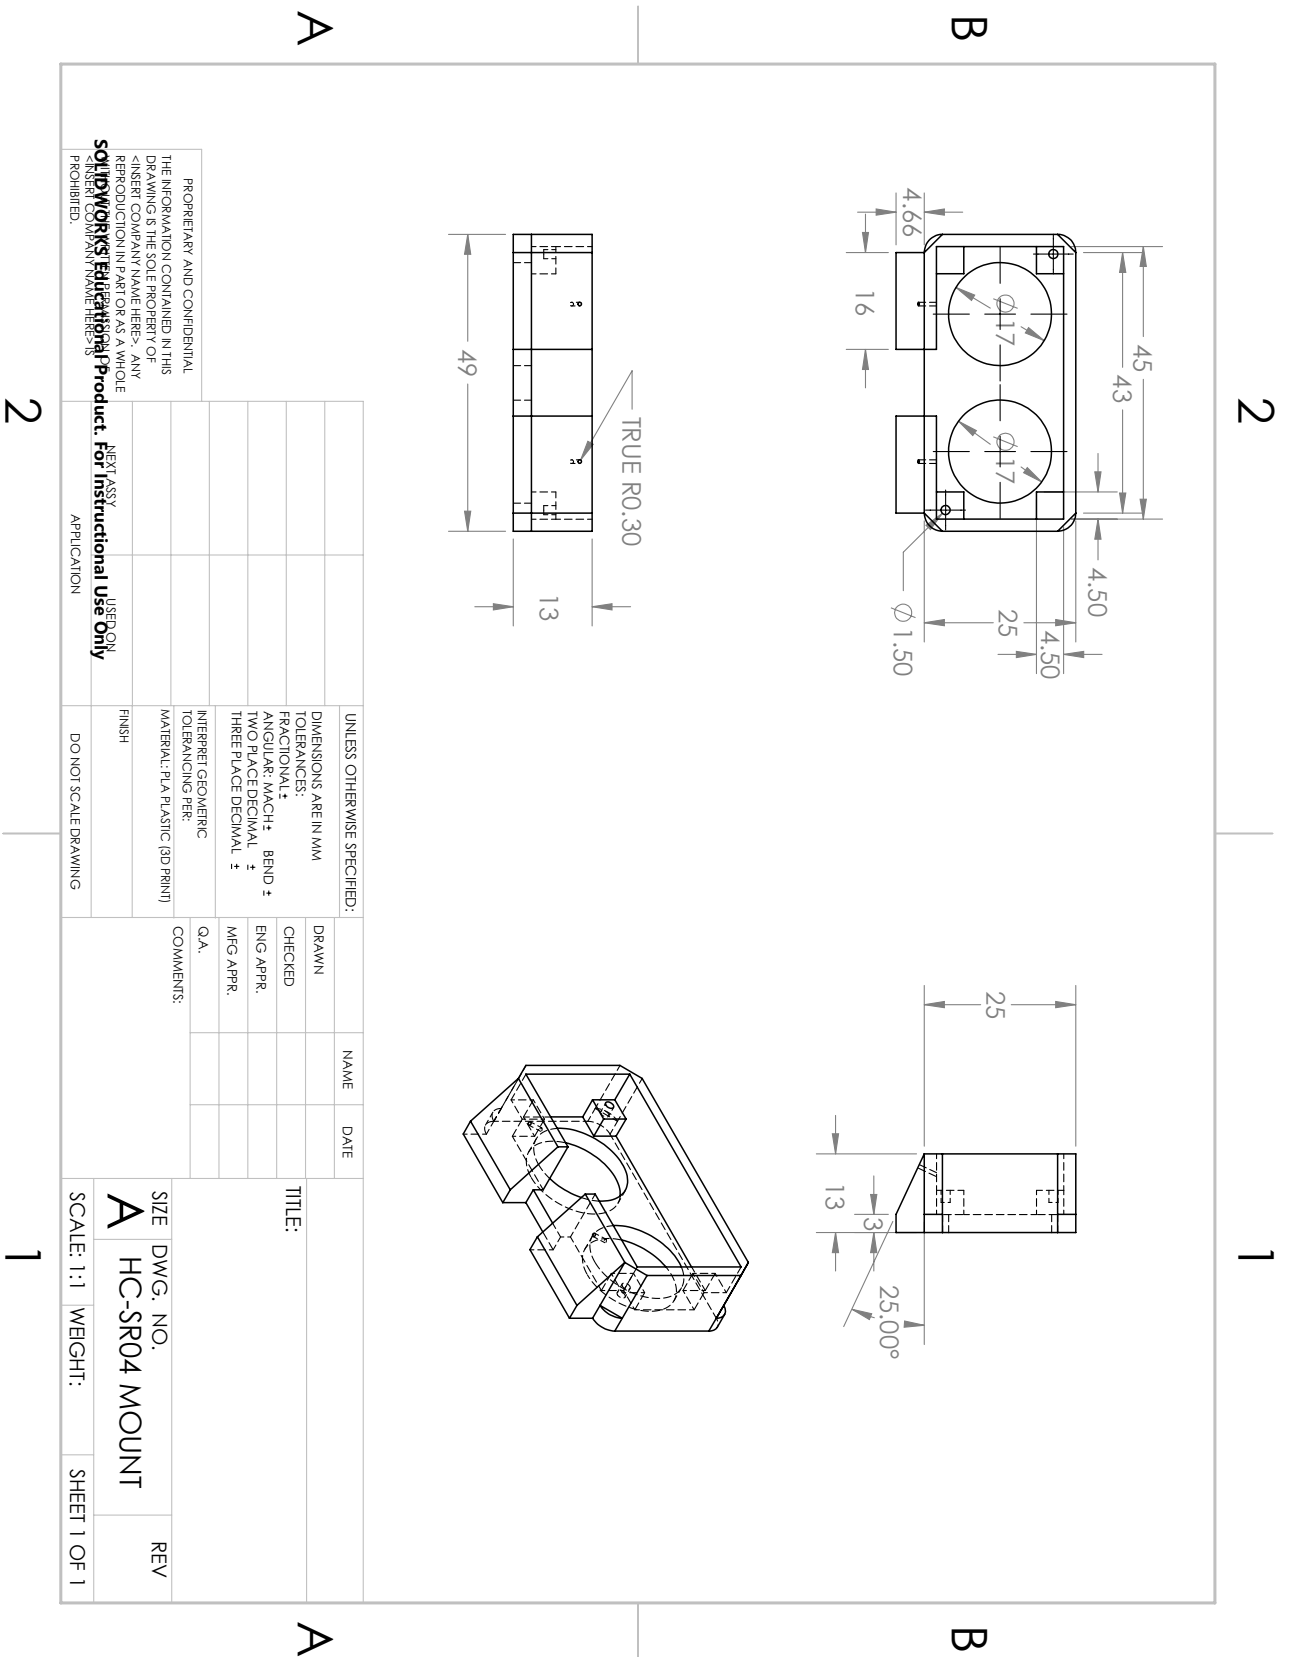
Technical drawing of the ultrasonic sensor mount, showing the dimensions.
